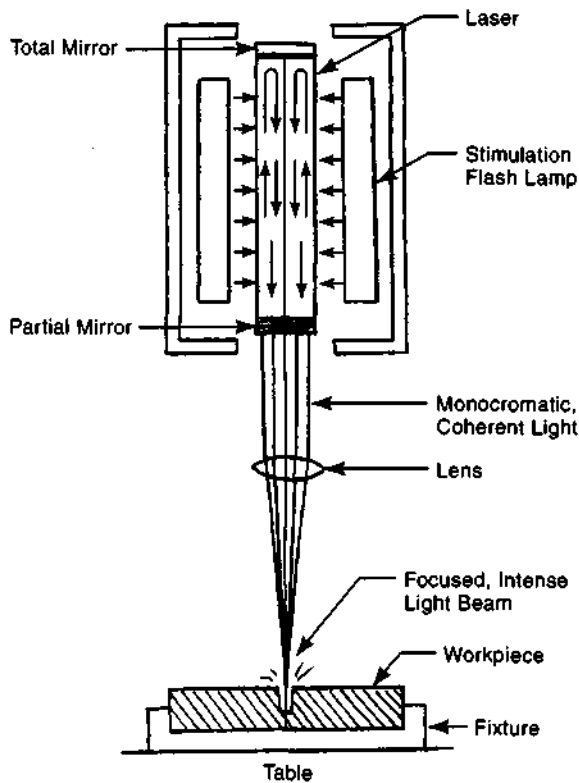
O Laser beam machining. The focused beam of coherent monochromatic light provides intense energy that melts and vaporizes workpiece material in a very small spot. By moving the beam and/or the workpiece, grooving, slitting, engraving, and other machining operations can be performed.
